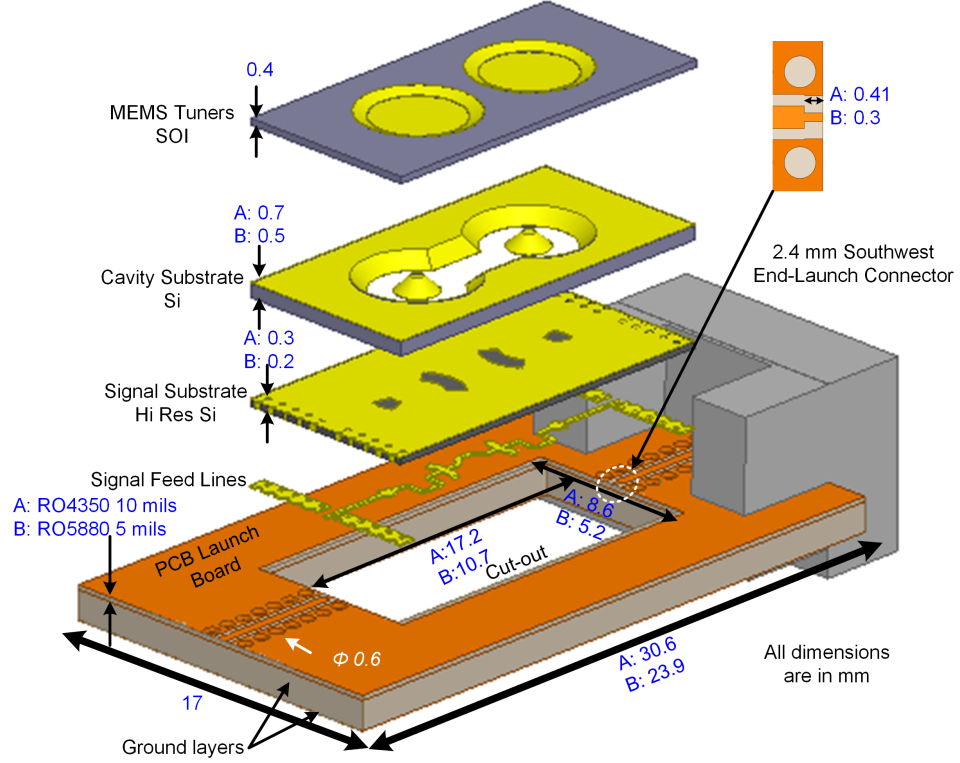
Exploded view of connectorized silicon micro-machined cavity filter, A denotes Filter A and B denotes Filter B.
